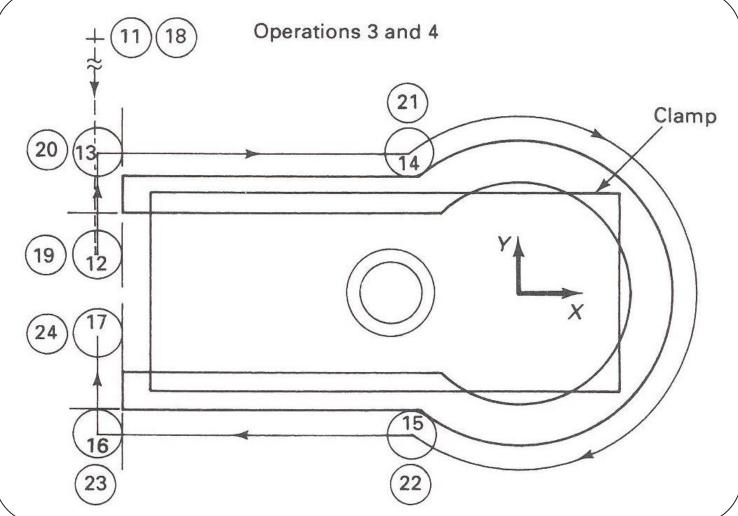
(b):Cutter path for milling the outside of the part the part of Fig. 6
